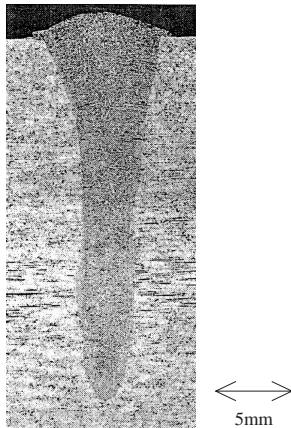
Cross-section of the laser welded bead (45 kW, 3 m/min)
